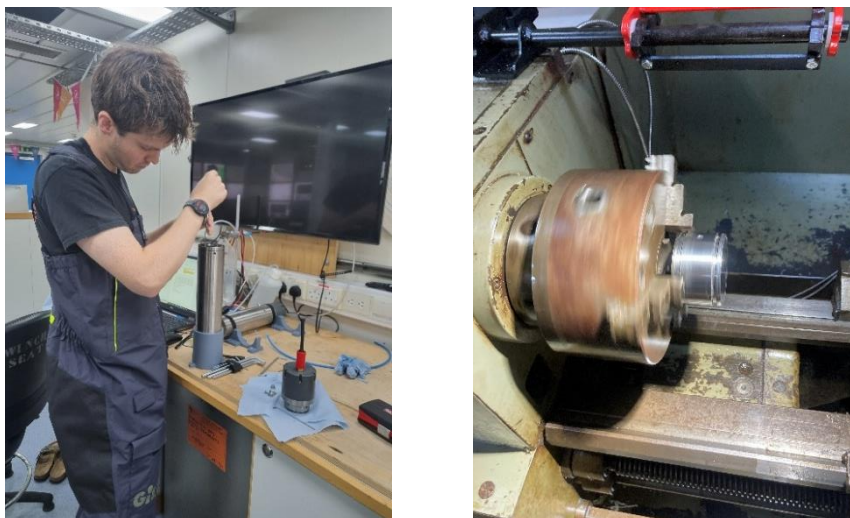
Disassembling GTS7 (left); Refinishing the piston on the lathe (right).
